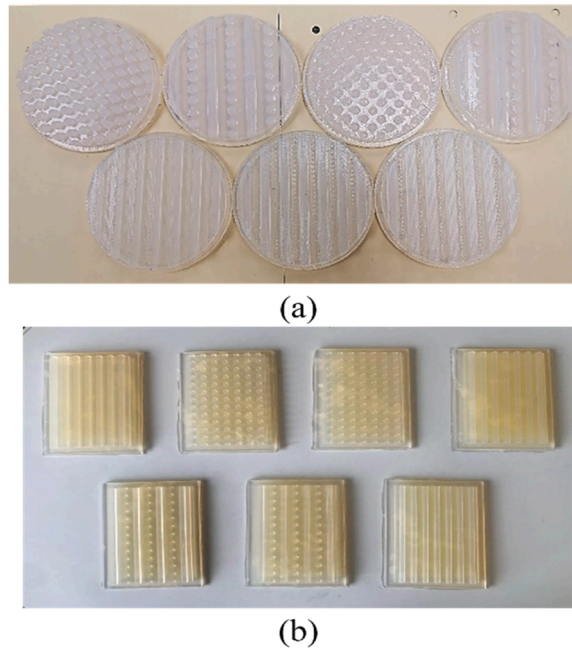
The produced flexible formworks: (a) flexible cylindrical formworks; (b) flexible rectangular formworks.
